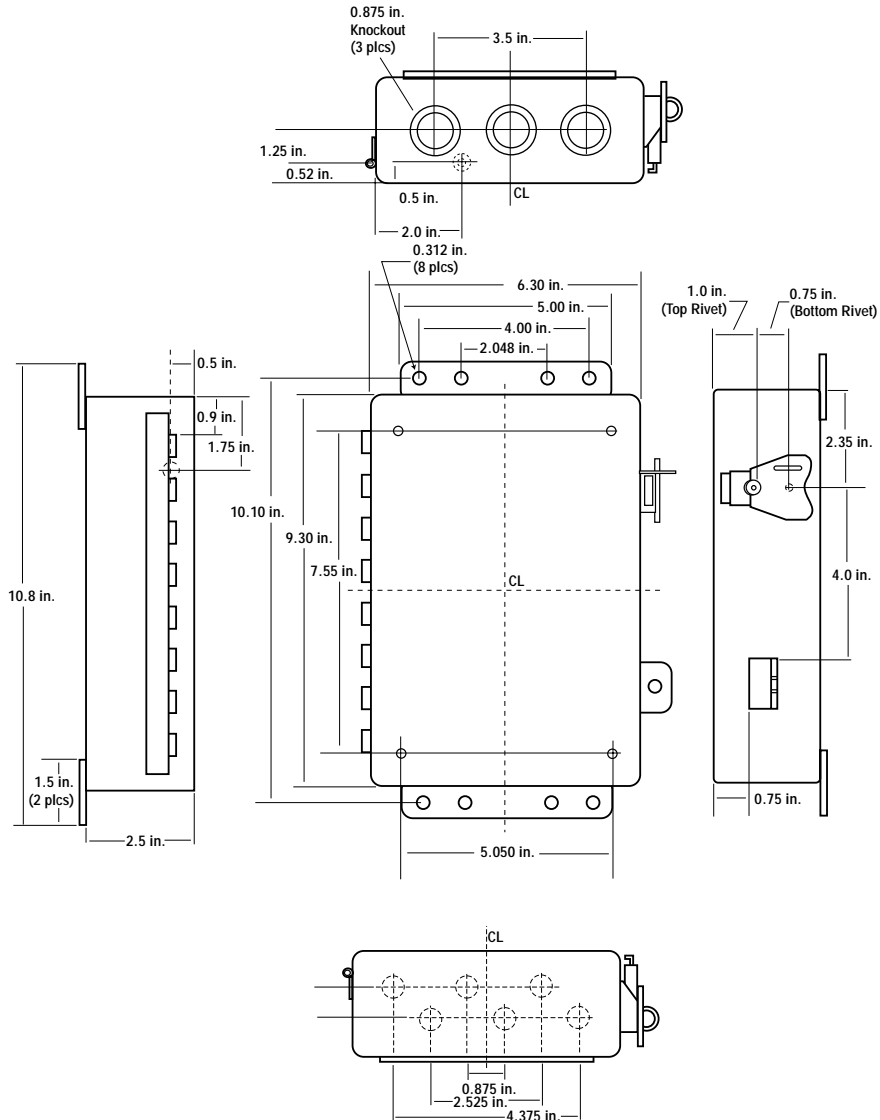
Mat Controller MC4 Dimensional Drawing
